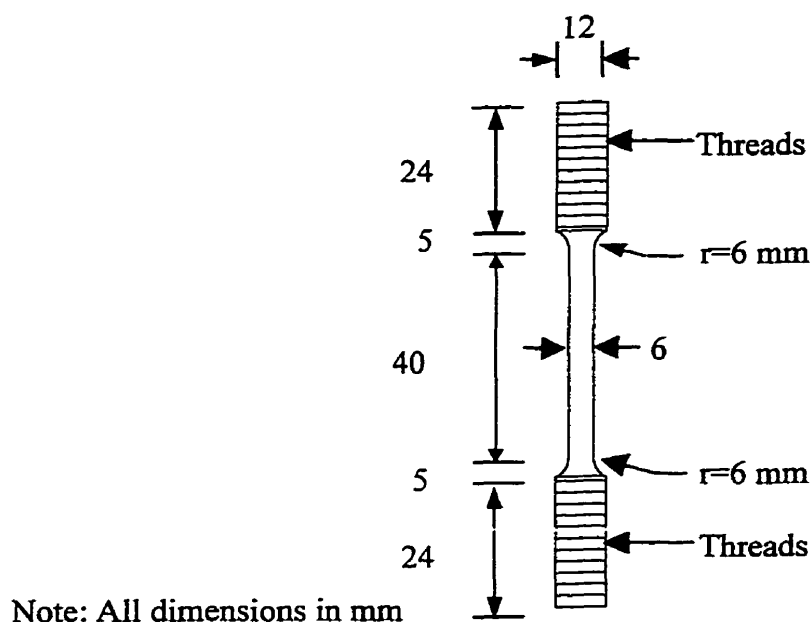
Dimensions of Machined Steel Coupons Tested
